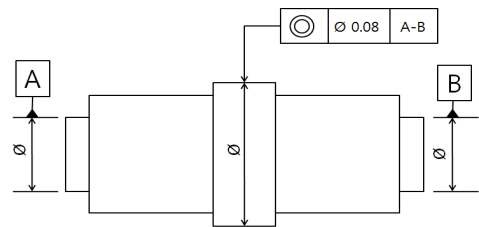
Drawing of cylindricity and analysis of tolerance zones
